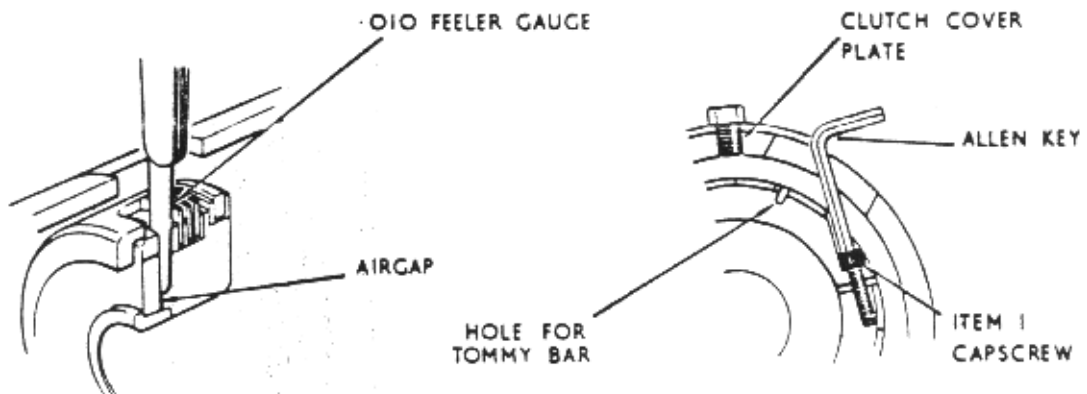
ADJUSTMENT TO DRAGLINE WINCH CLUTCH
